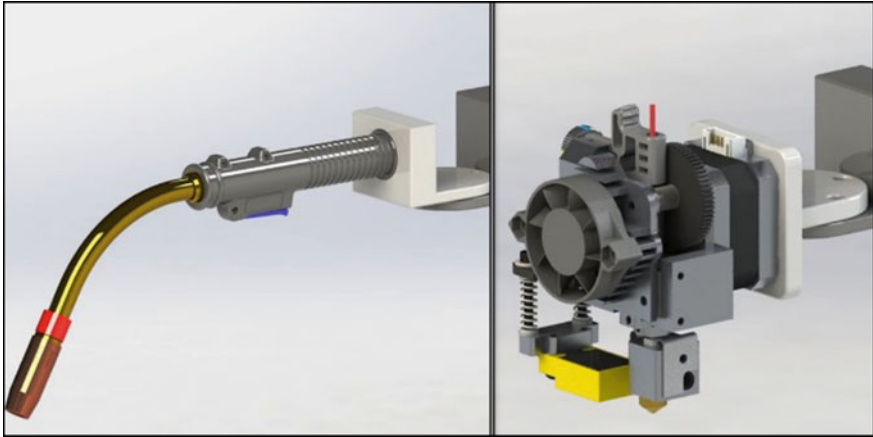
(4) Welding attachment, (5) 3D Printing attachment
